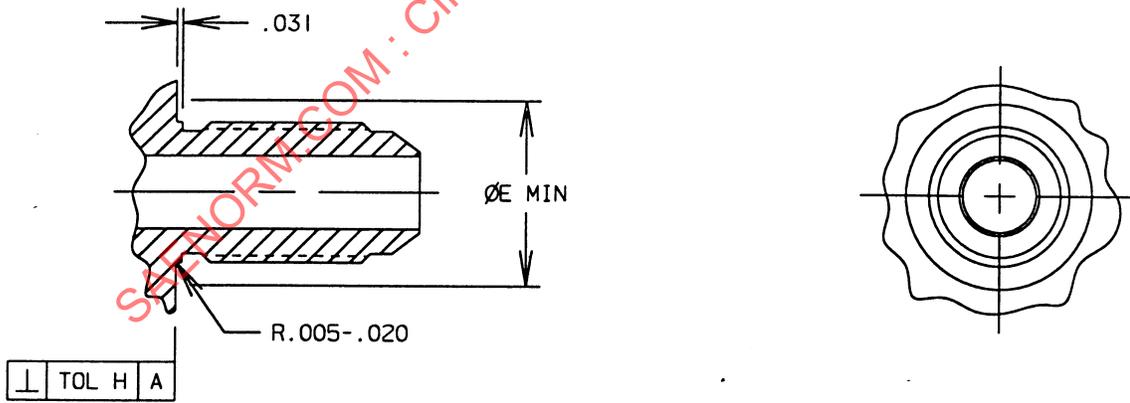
FITTING END DESIGN, STYLE H, SAME AS STYLE G EXCEPT AS SHOWN
